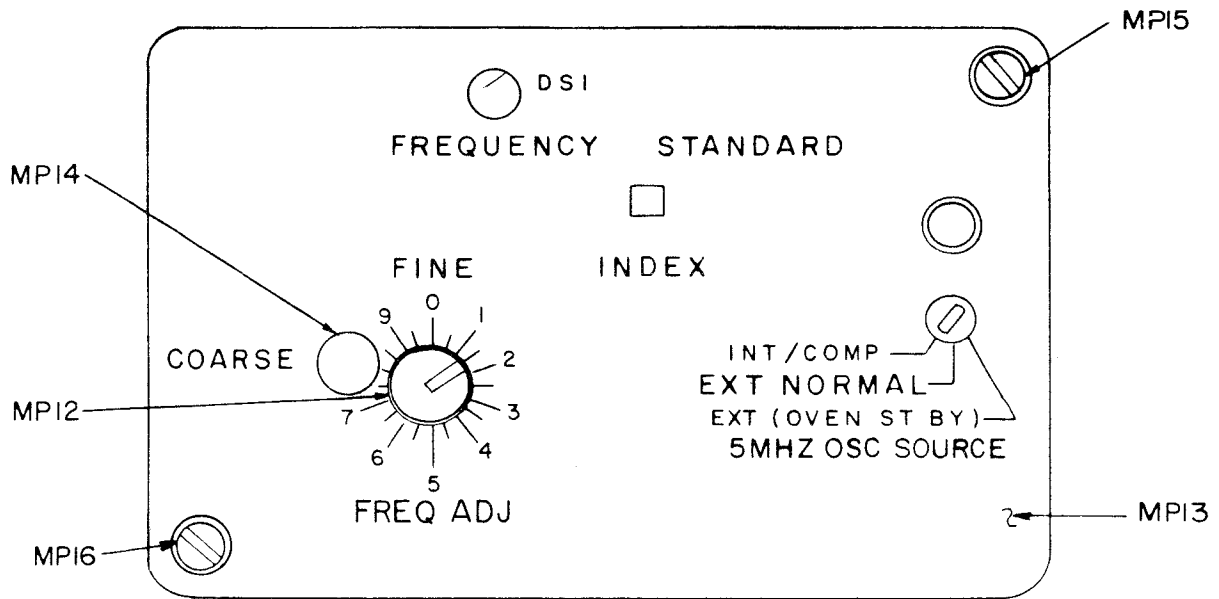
Frequency Standard Assembly A2A5, Component Locations
